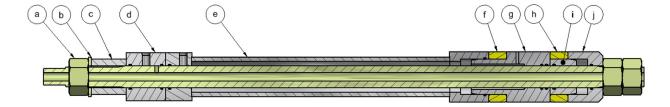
Double Block and Bleed Isolation Plug Component Parts
